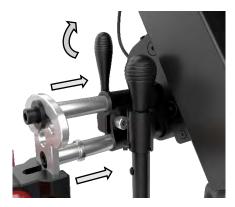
Assembling the Clamp Assembly to the Width Adjustment Assembly
